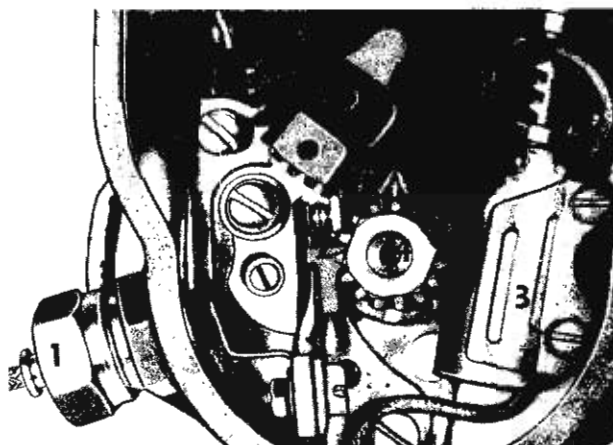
LA-6 Magneto Timing Marks, Internal Parts
